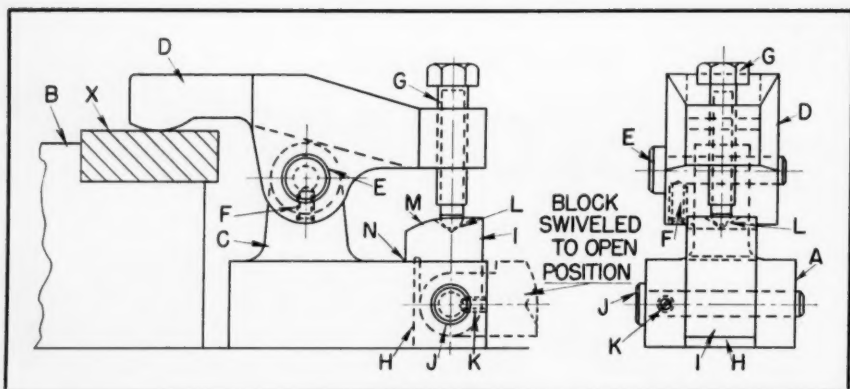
Alternative design of quick-acting fixture clamp with greater adjustability for handling work of different thicknesses
